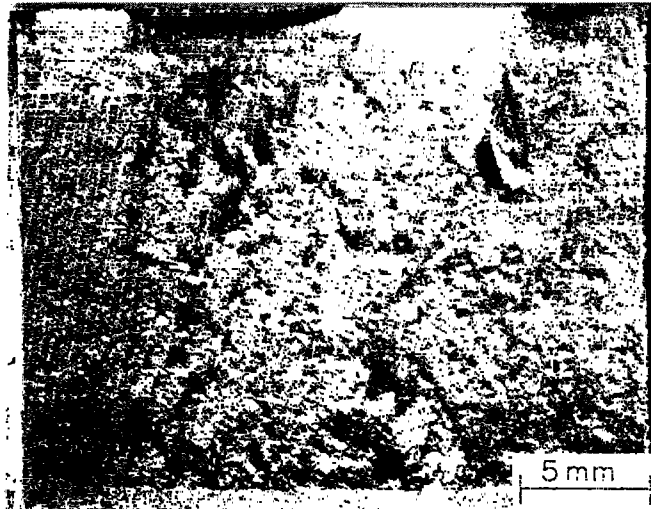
Fracture surface of specimen E, the HY-130 SMA weldment
